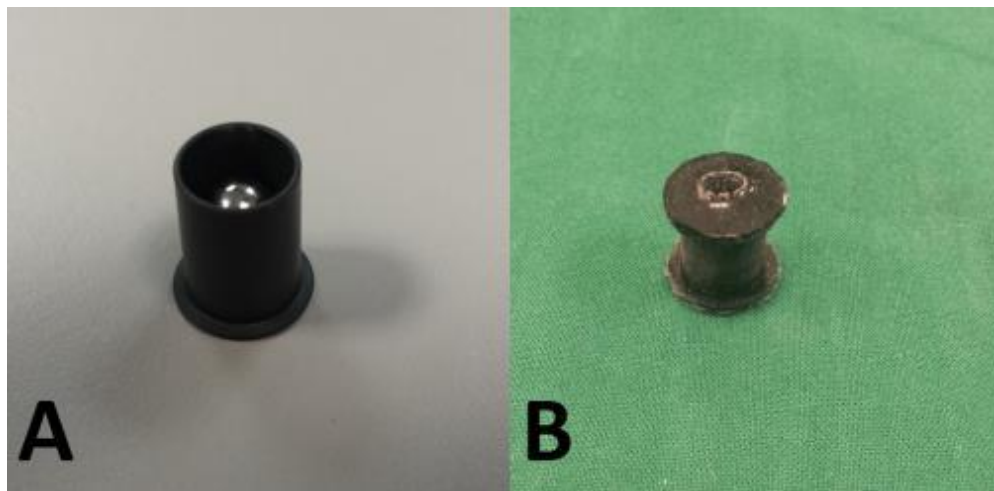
Final fabricated products. (A) PVC inner core and ball bearing. (B) Assembled prosthesis with carbon nanocomposite skin.
